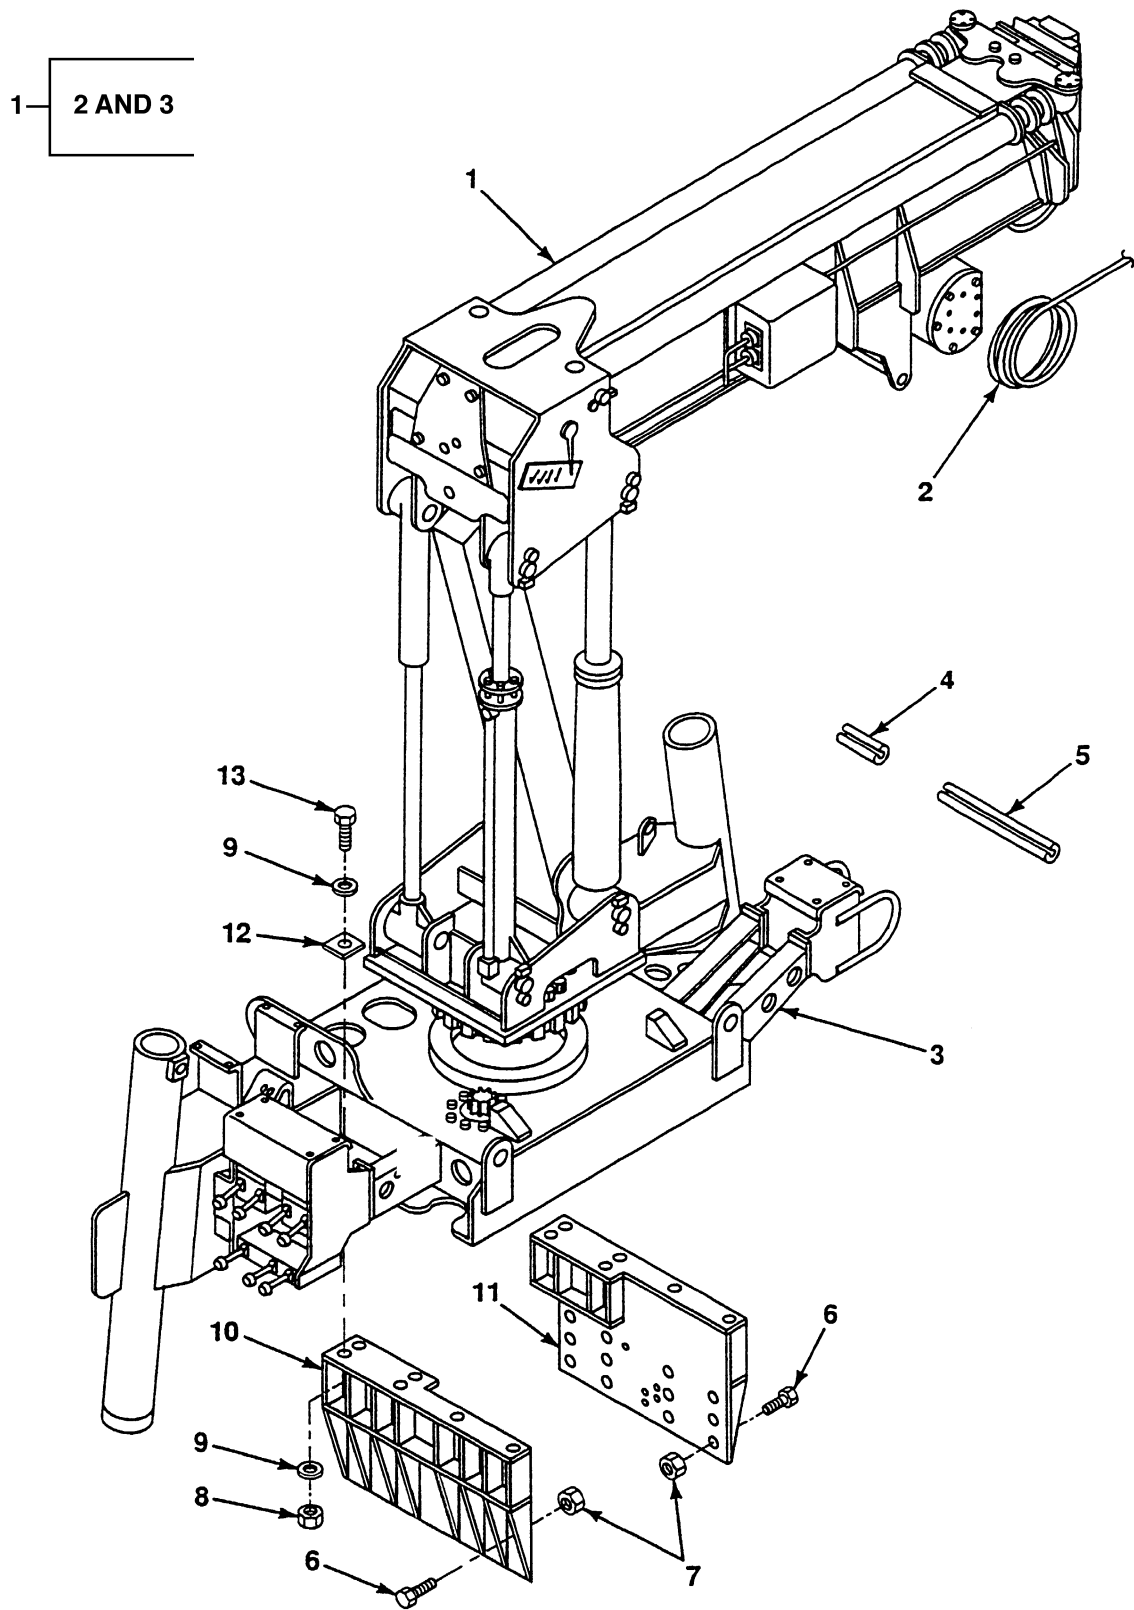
BASIC CRANE, CABLE AND MOUNTING
